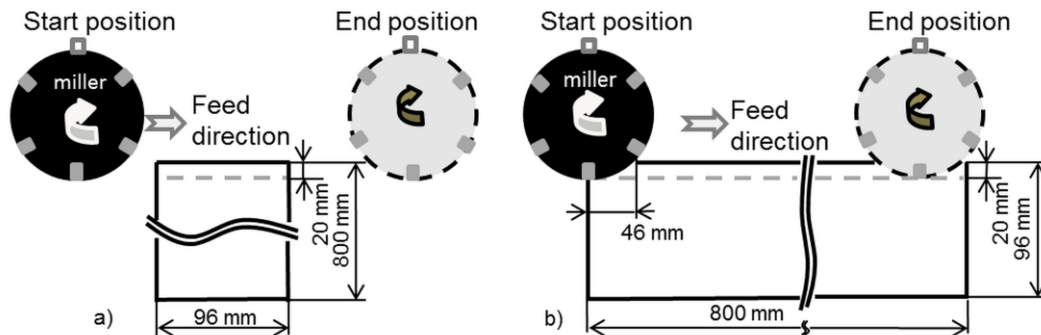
Scheme of applied milling test setups with different cut segment lengths and feed rates of a) 96 mm and 0.5 mm/tooth referred to as test setup A and b) 800 mm and 0.4 mm/tooth referred to as test setup B [4], [10]. Only one of six cutting inserts in tool-workpiece contact.
